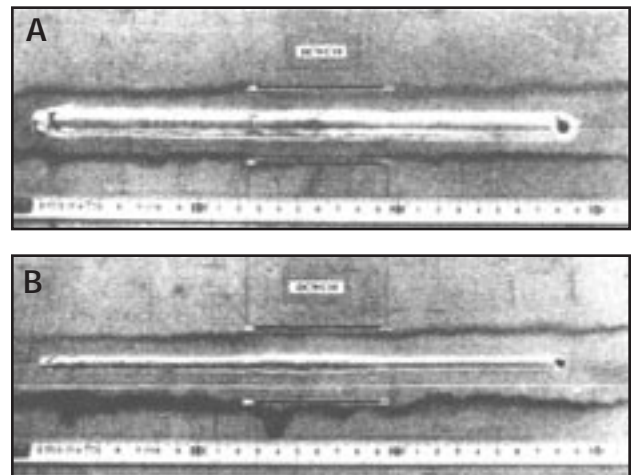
A weld bead in a butt joint with the closed-loop control of weld formation using both wire feed and welding current as controlling variables. A — Top face; B — bottom face.
